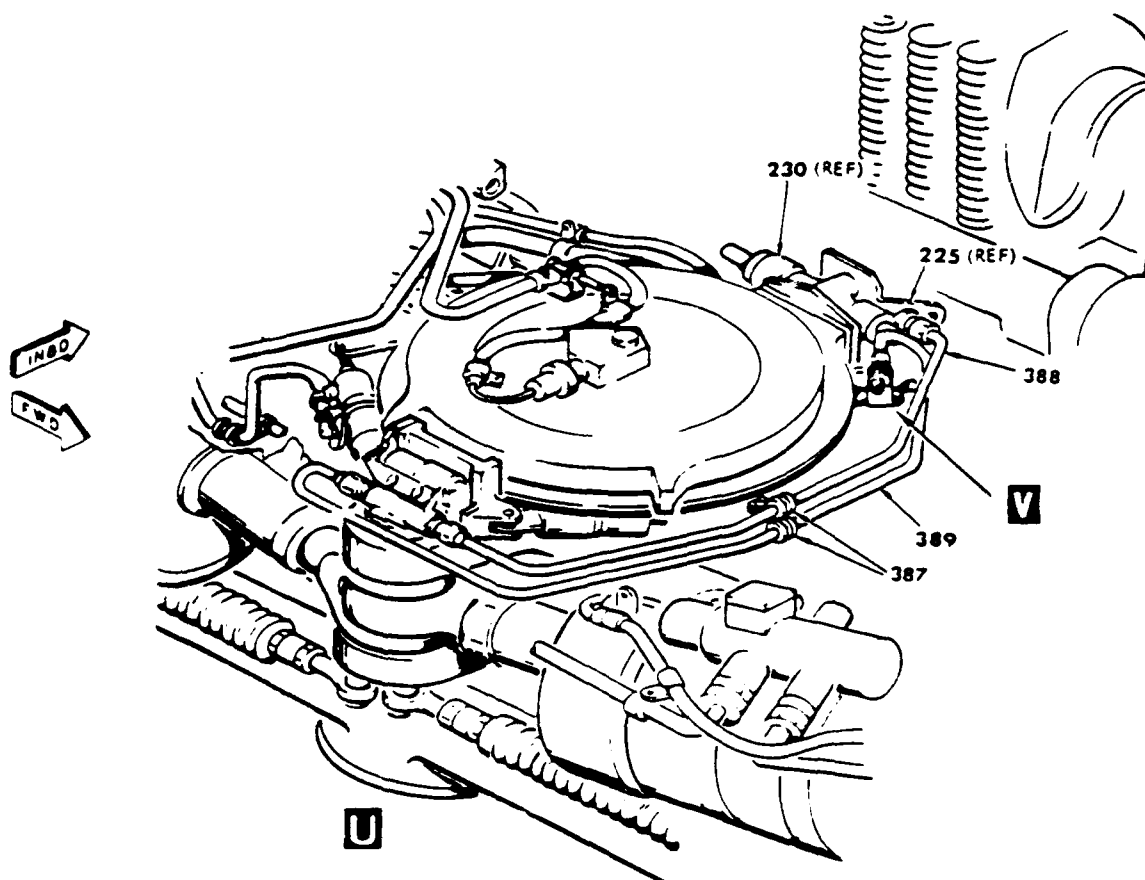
RH Aft Strut Assembly (Sheet 15 of 18)
